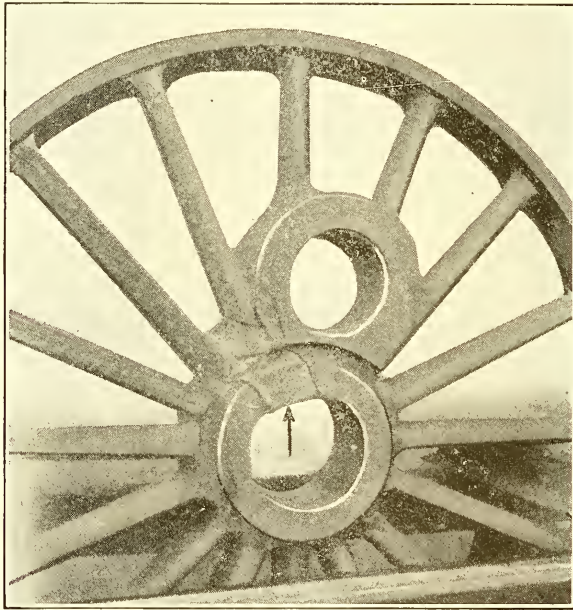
Weld on Driving-Wheel Center.
